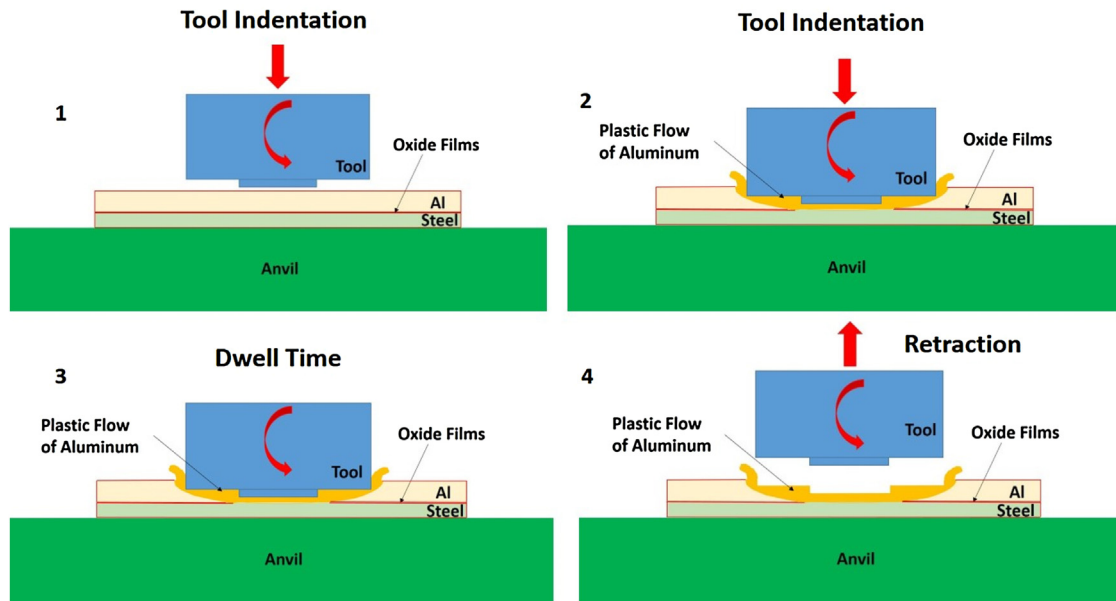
Friction Stir Spot Welding of Aluminum to steel sheets.
